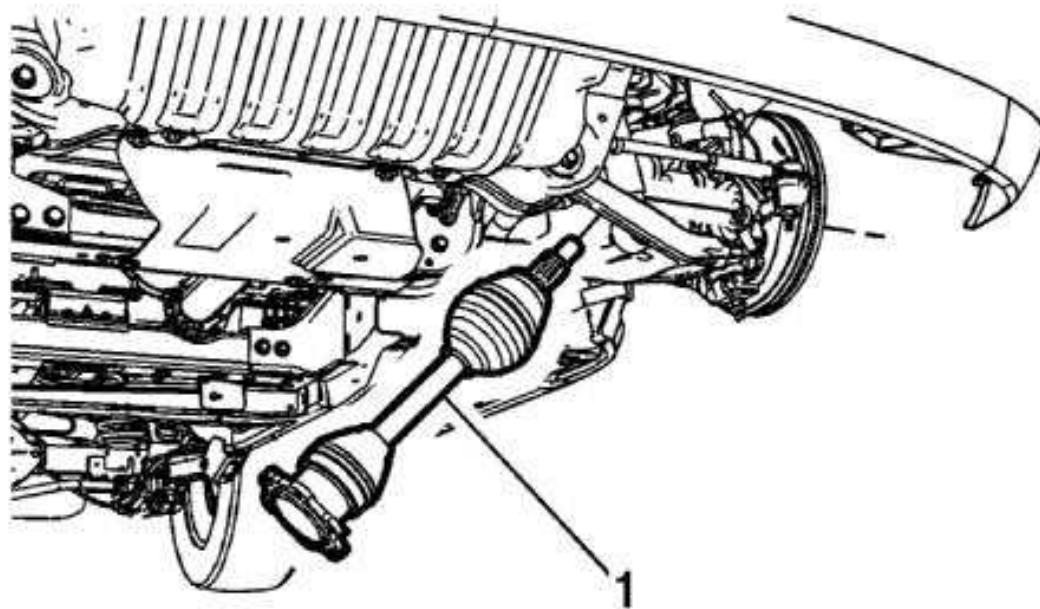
Wheel Drive Shaft Through Lower Control Arm Opening
